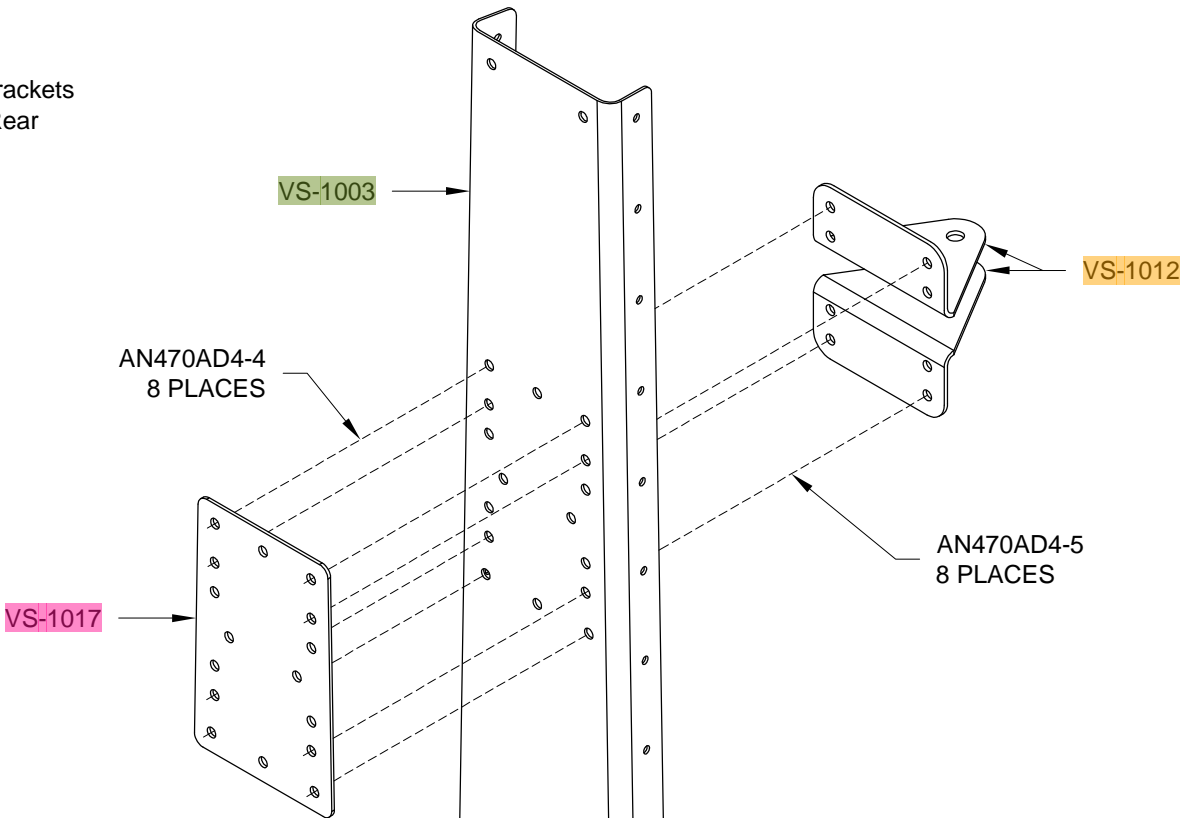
TOP RUDDER HINGE BRACKET AND HINGE DOUBLER RIVETS
